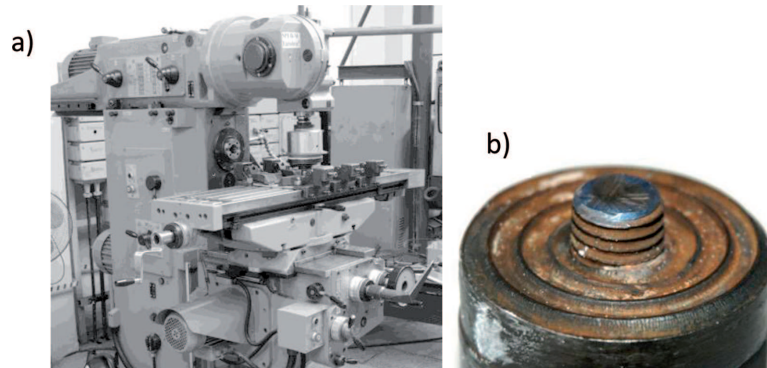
Experimental setup a) general view, b) Friction Stir Processing tool
